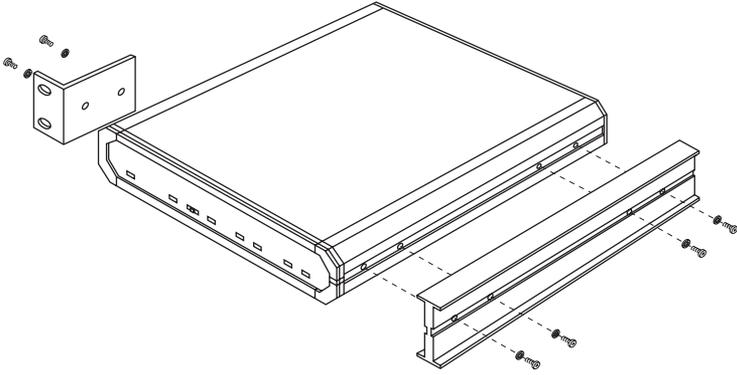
Attaching the rail and bracket to one of the two FOLDS.
